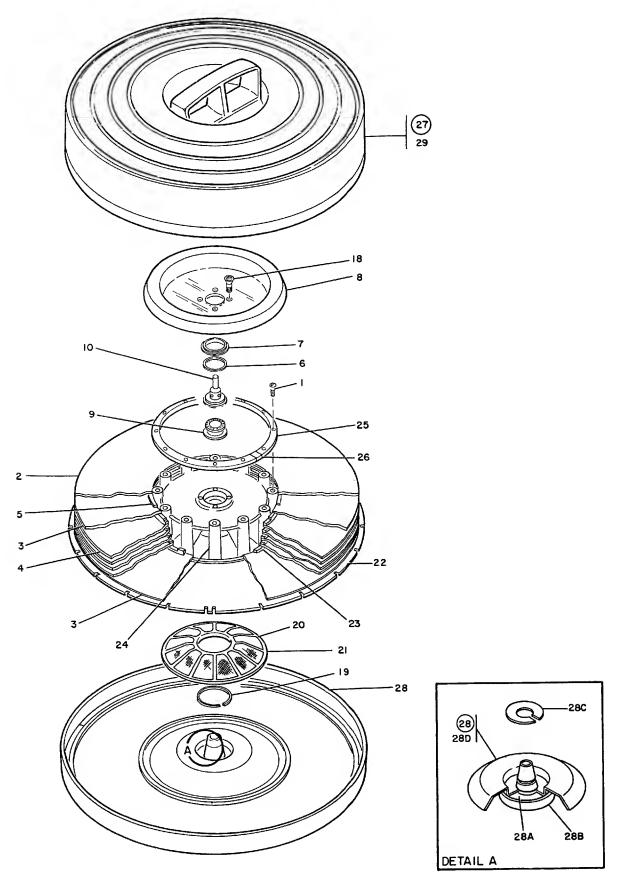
A. DISK PACK ASSEMBLY. SEE LIST 18A.
